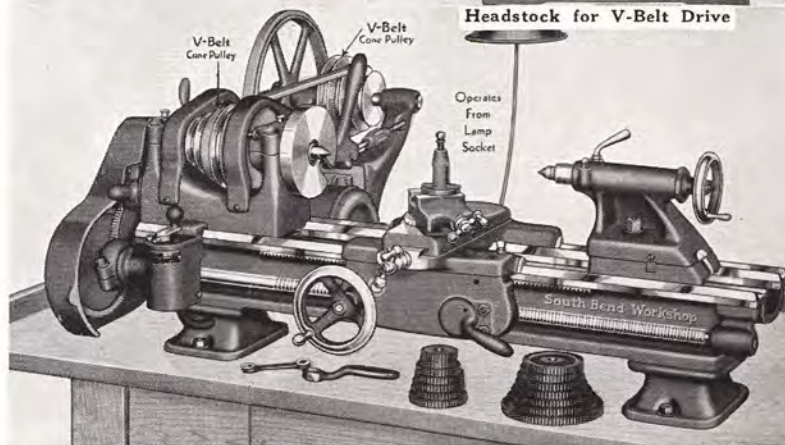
Cat. No. 415-YV, 9" x 3" "Workshop" V-Belt Horizontal Motor Drive Bench Lathe, complete as shown, less bench. (Ship. wt. 310 lbs.) . . \$136.00
